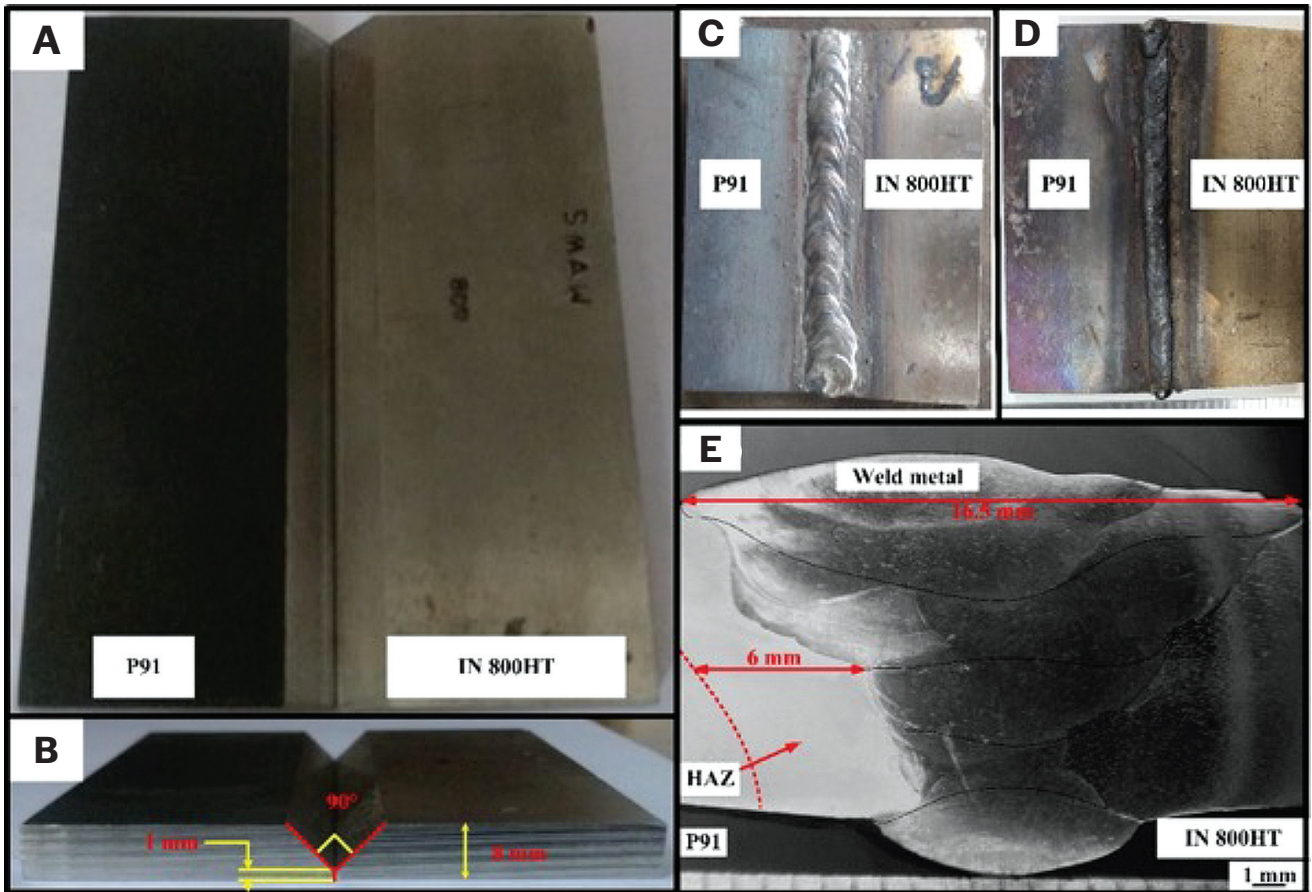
A – Machined groove surfaces; B – groove design schematic; C – welded plate top face; D – welded plate bottom face; E – SMAW weld macrostructure.
